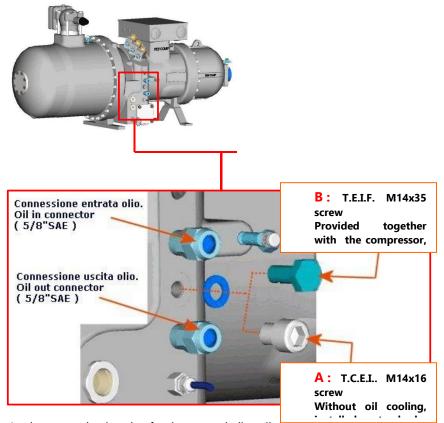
oil inlet/outlet connection location for the external oil cooling circuit;
